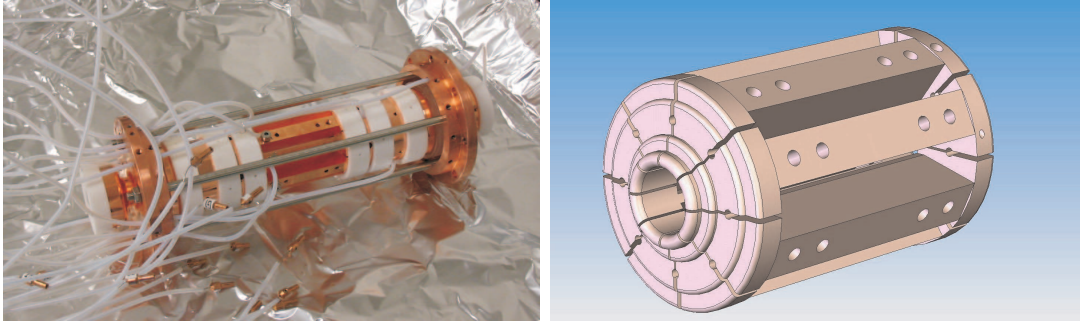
Photograph of trap assembly (left) and a model of the eight-fold segmented central drift tube (right).
